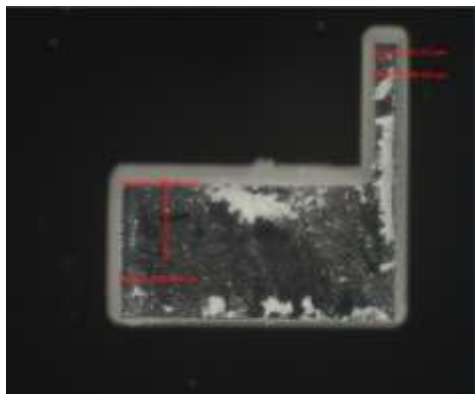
Machined LiF target component. Some debris from machining is visible which was carefully removed during target assembly.
